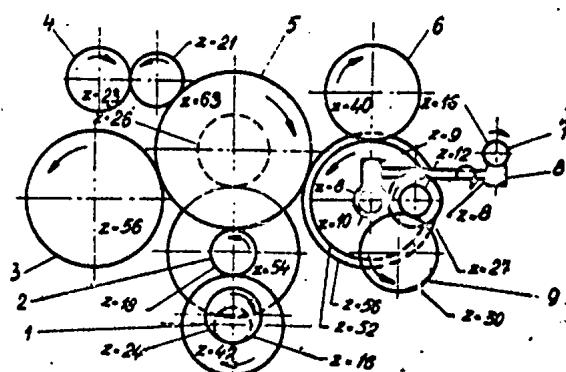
The scheme of the accessory-units drive assembled in the supercharger-rear body and on the rear cowling /view from the back-side/
